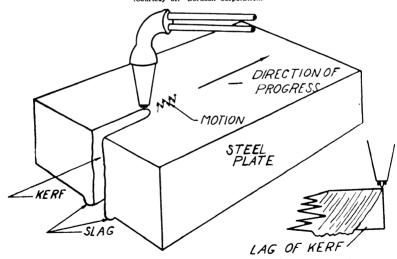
Cutting a thick piece of steel using the oxy-acetylene cutting torch
